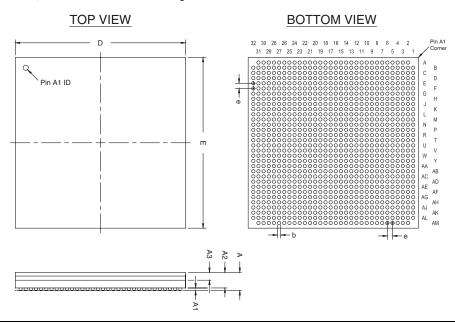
1,020-Pin FineLine BGA Package Outline
